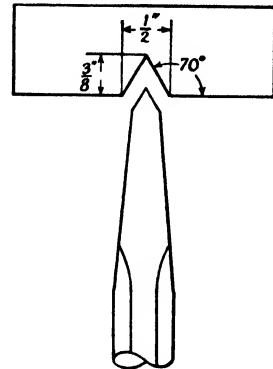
Checking the angle of grinding on a cold chisel. For general work, the cutting end should be ground to an angle of about 70 deg. A gage for checking the angle may be made of sheet metal. (See also Fig. 7-42.)
